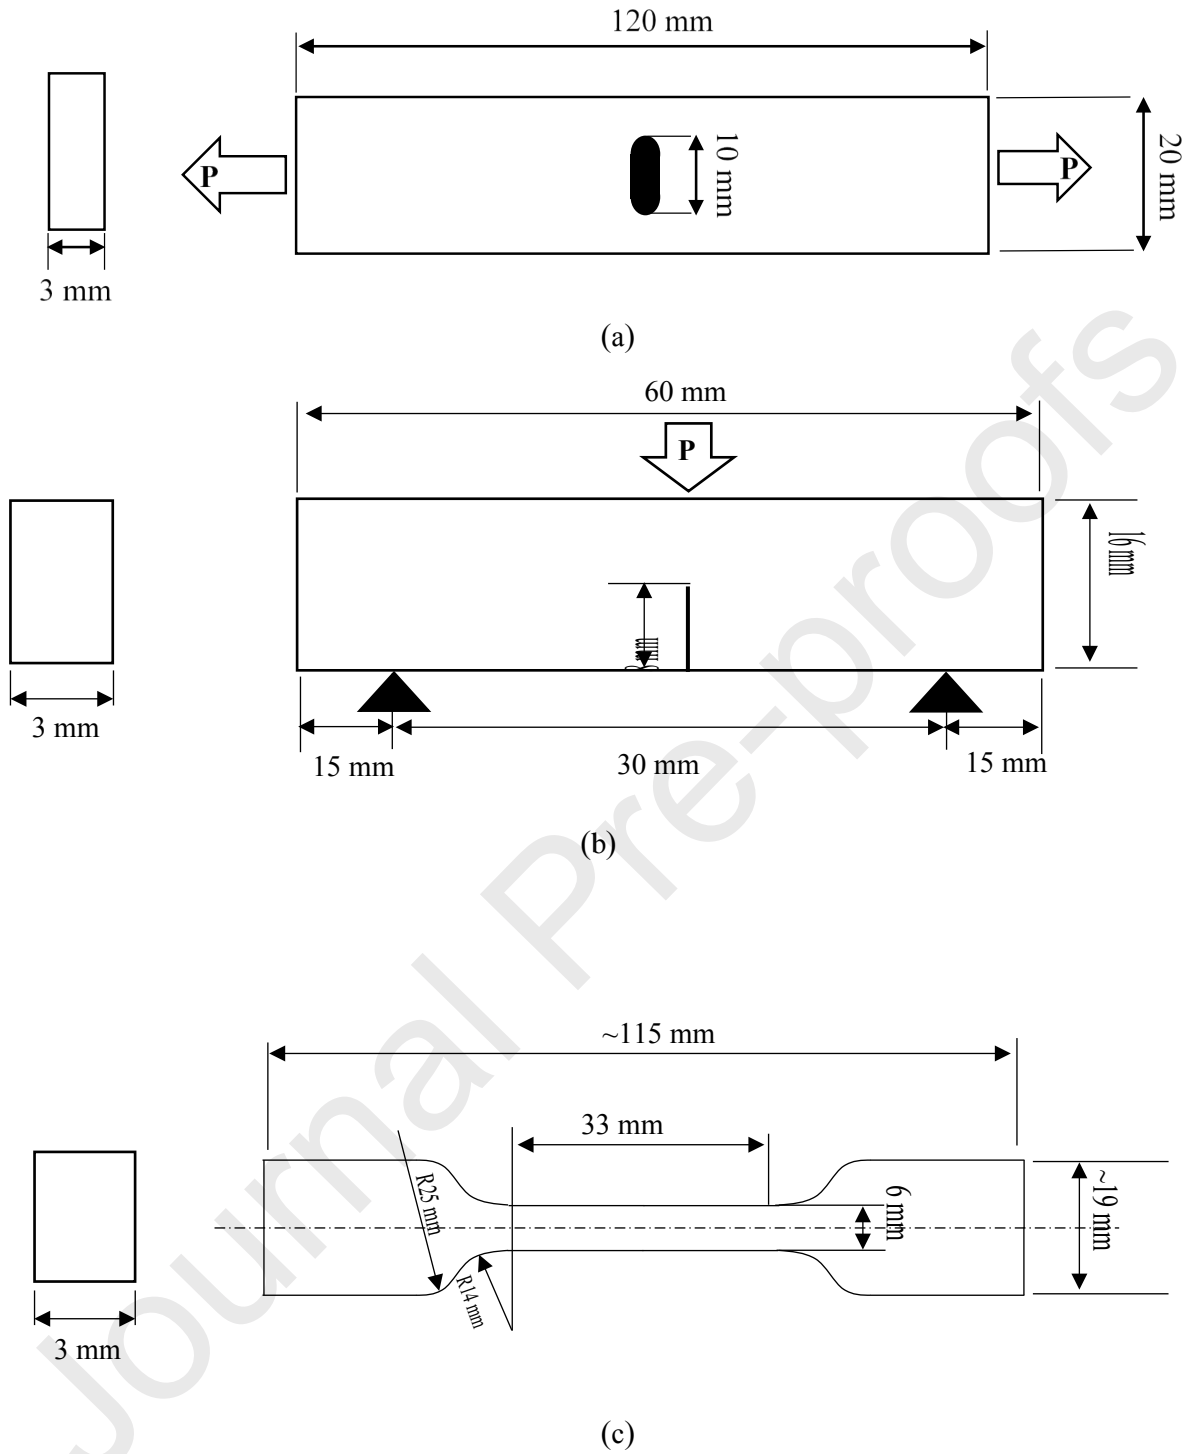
Dimensions of the samples tested: (a) U-notched samples, (b) cracked samples, (c) standard tensile test samples.
